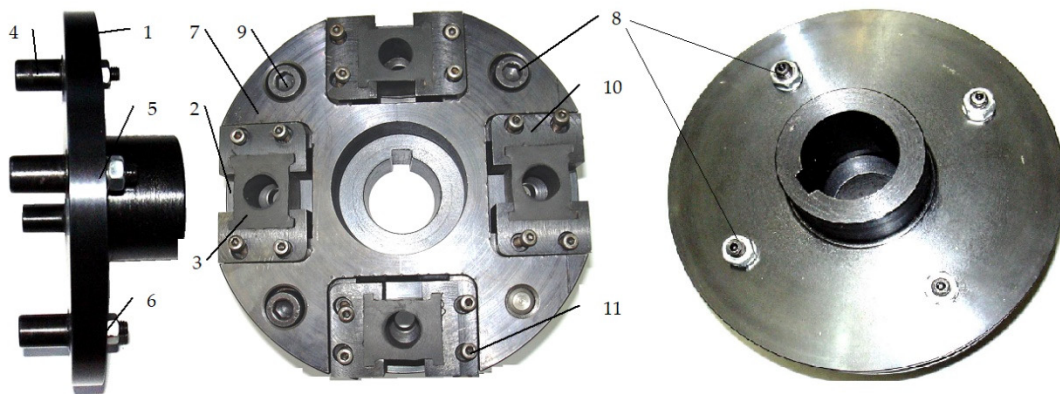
Proposed elastic coupling with bolts and elastic intermediary elements. 1—driver half-coupling; 2—driven half-coupling; 3—elastic intermediary pieces; 4—bolts; 5—grower washers; 6—nuts; 7—intermediary disk; 8- screws; 9—pin; 10—metal supports; 11—screws.
